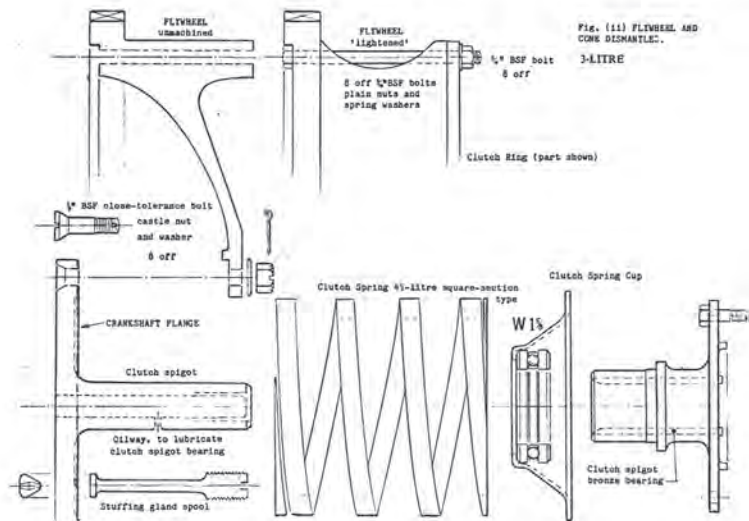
FLYWHEEL AND CONE DISMANTLED.
